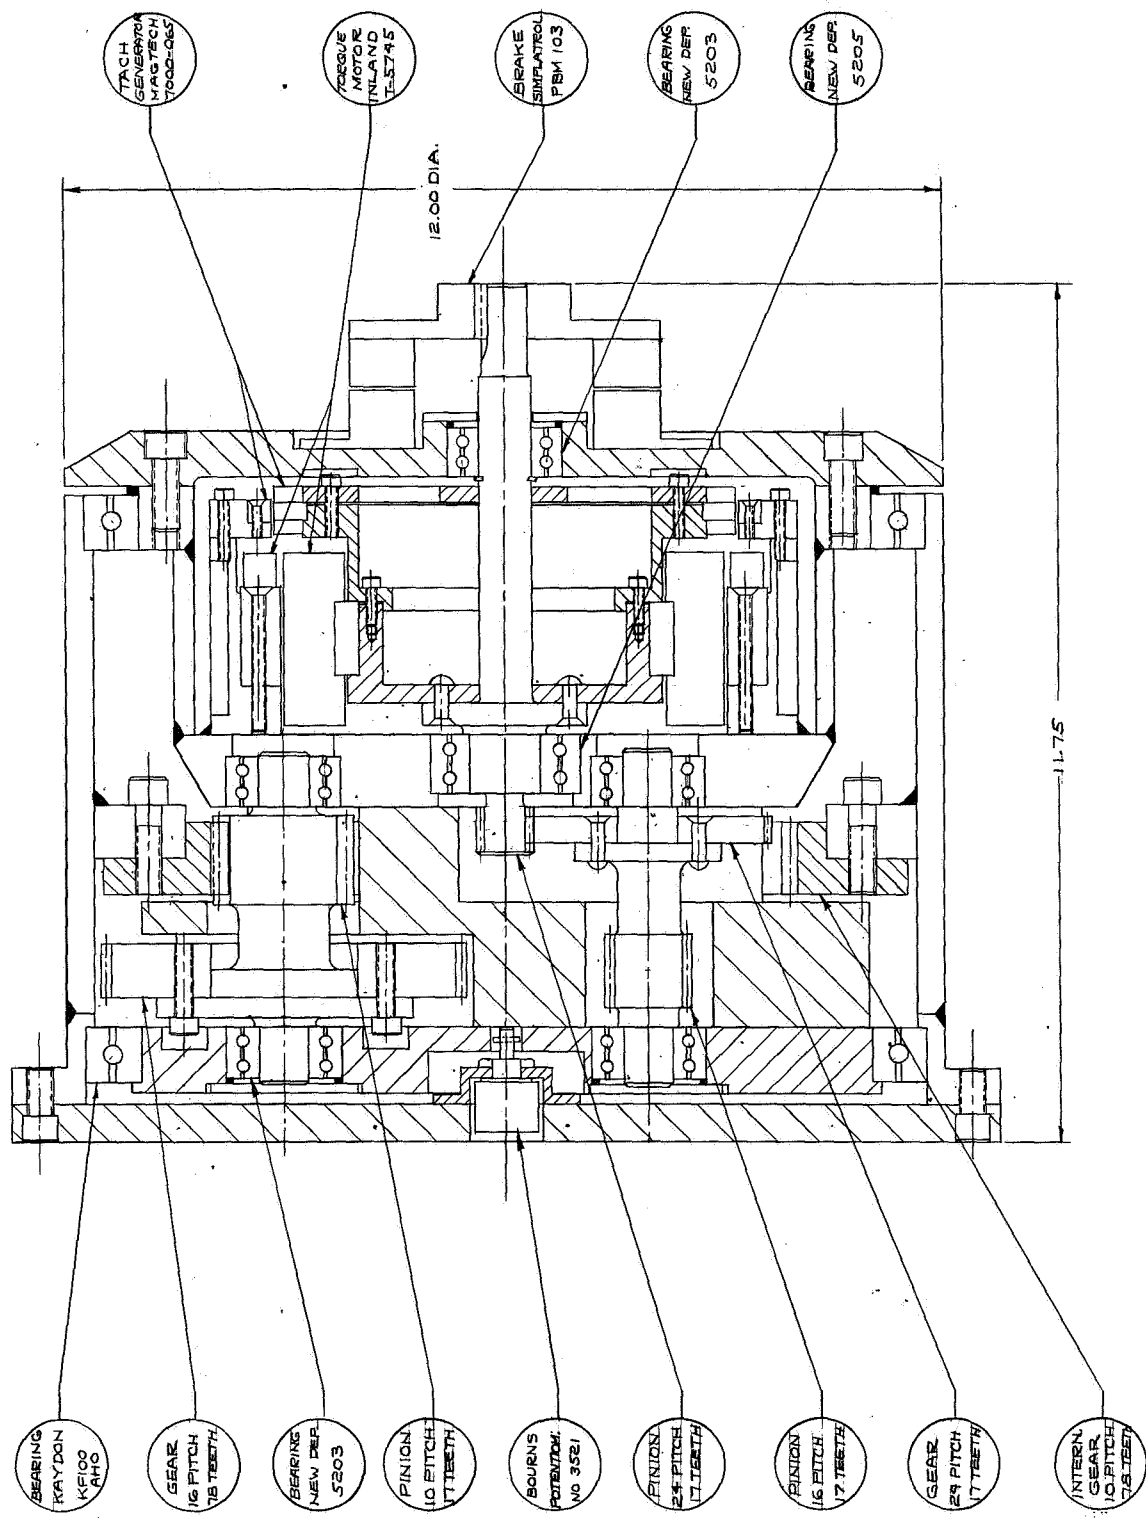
AMS Shoulder Pitch Joint Assembly
